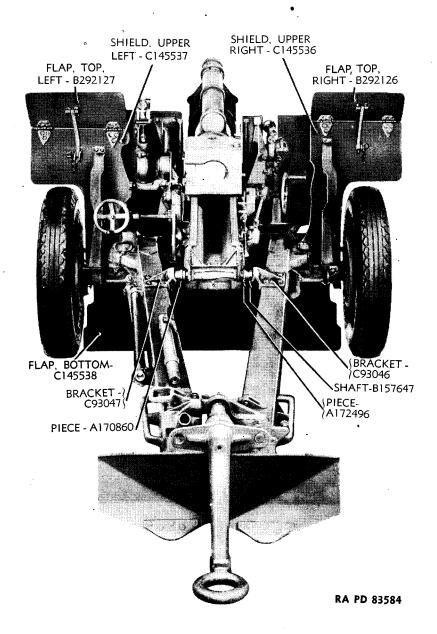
105-mm Howitzer M2A1 and Carriage M2A2 — Rear View
